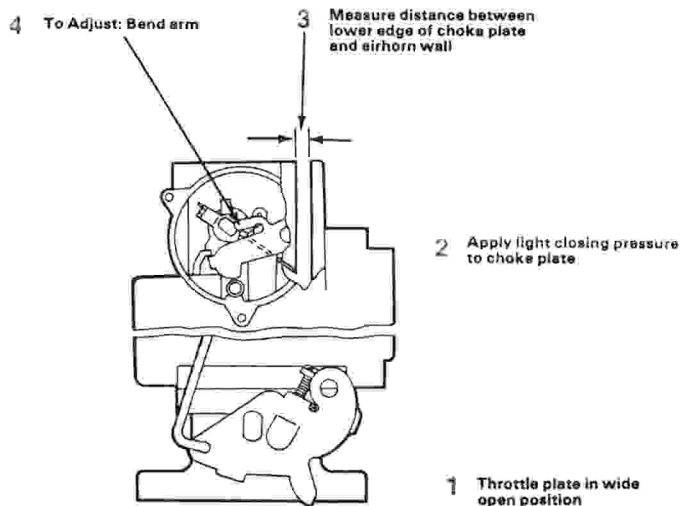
CHOKE UNLOADER ADJUSTMENT (INSIDE CHOKE HOUSING)
